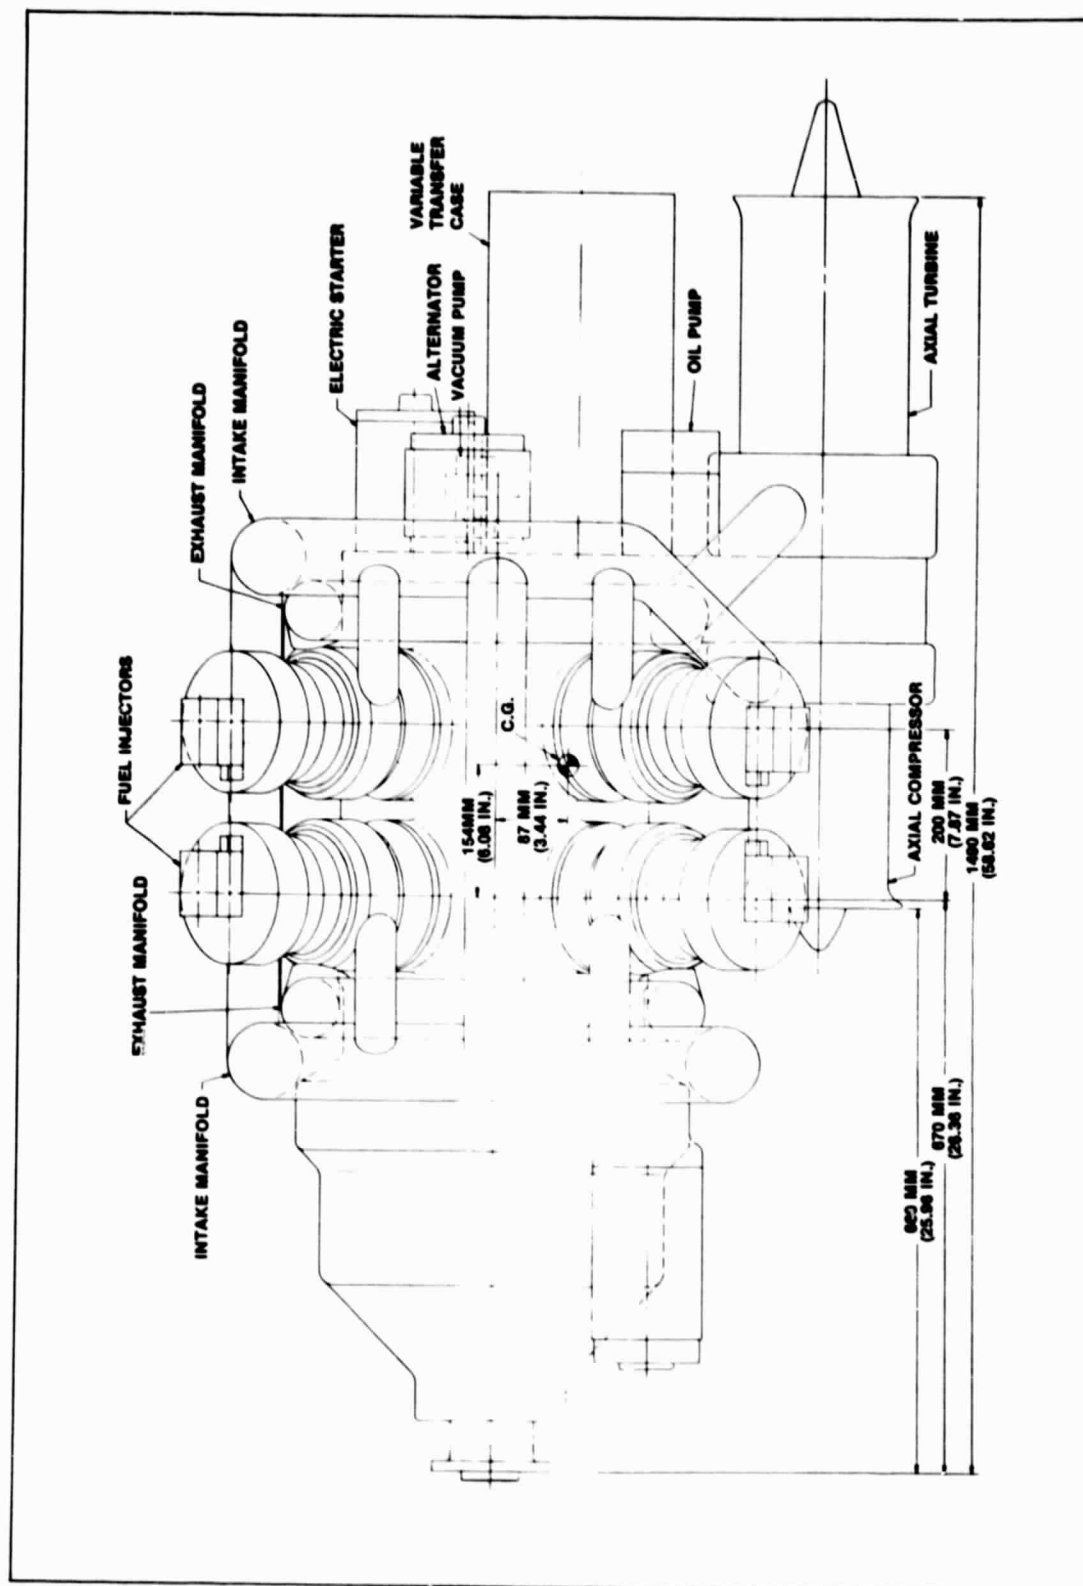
1431 kW COMMUTER AIRCRAFT DIESEL — SIDE VIEW
